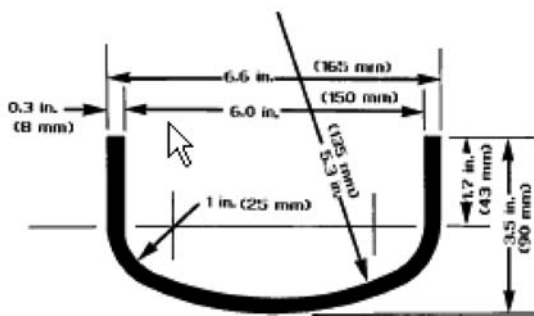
Standard 6 in. (150 mm) Weld Cap
